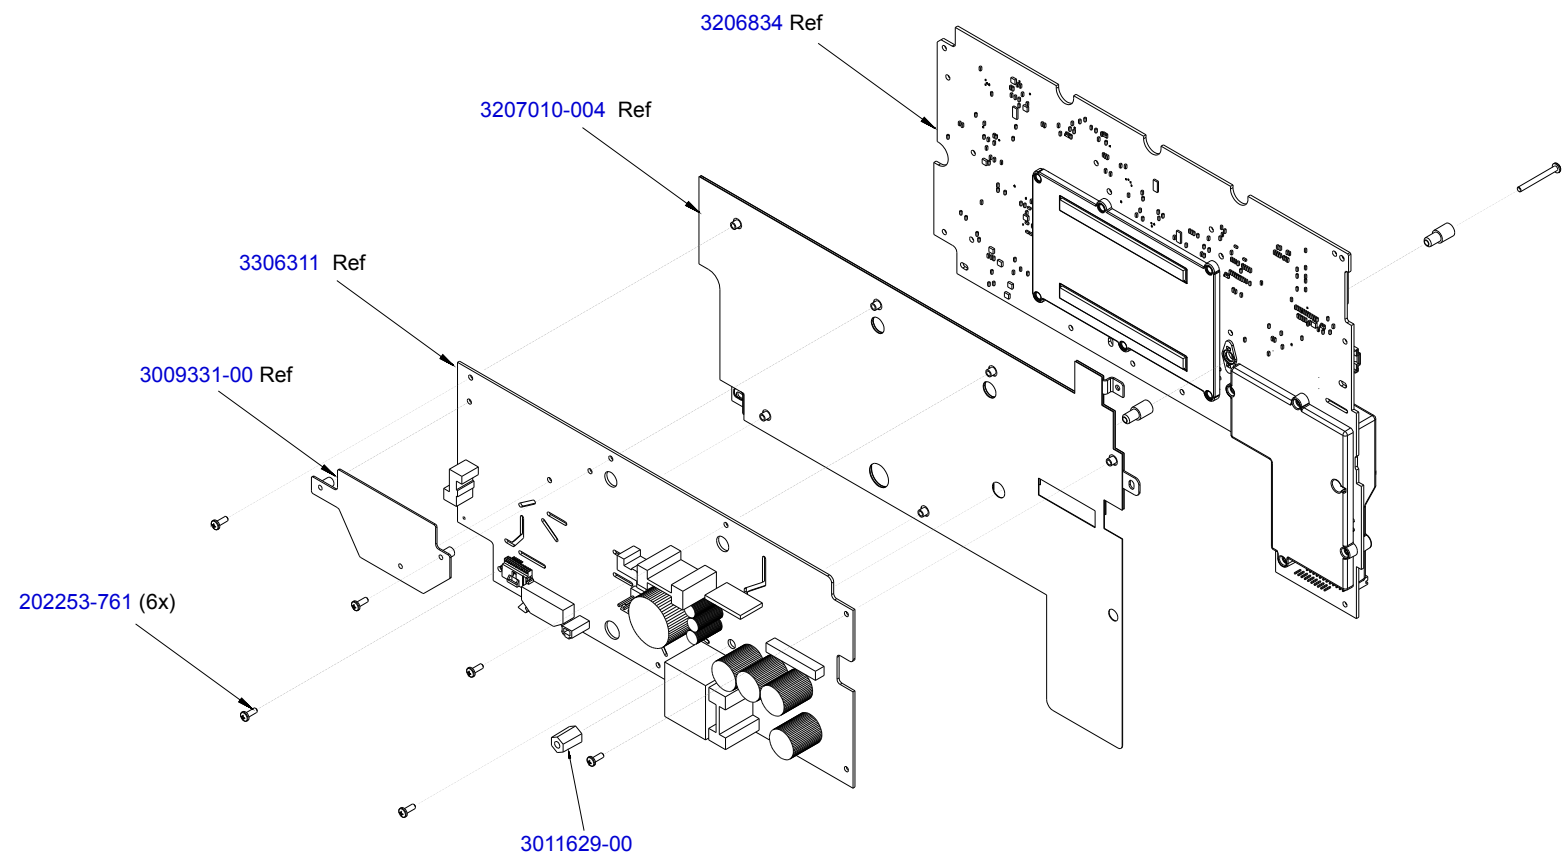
System/Therapy PCB assembly view 2 of 2
